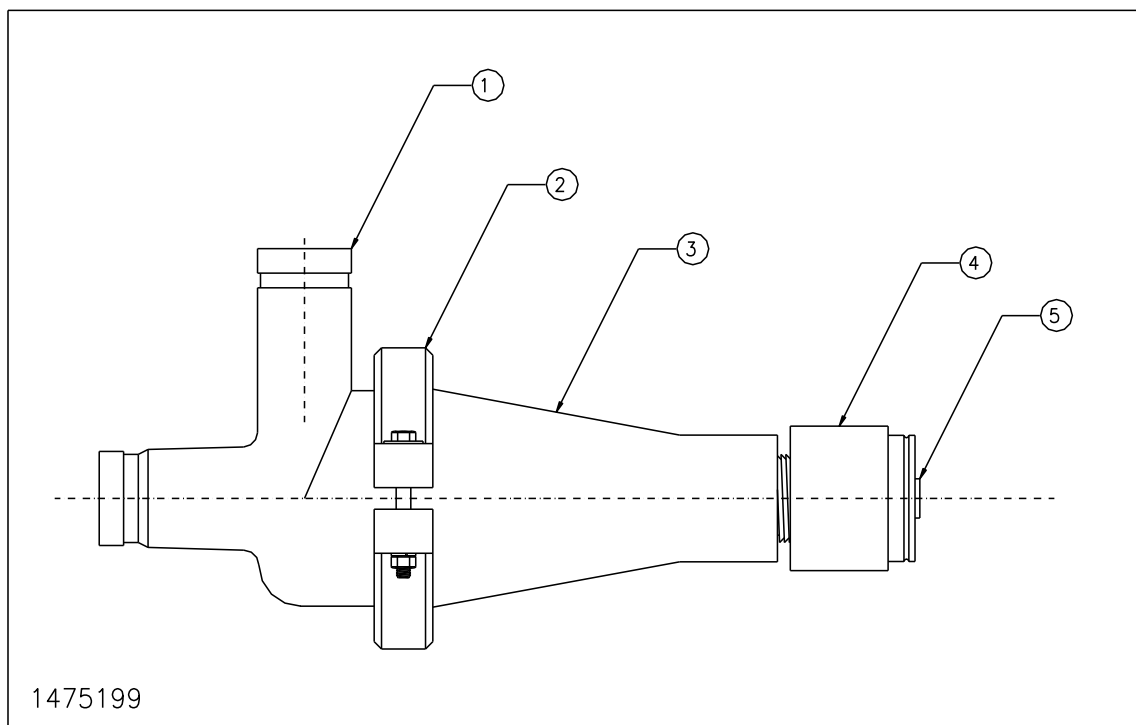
4" CTX CONE ASSEMBLY
